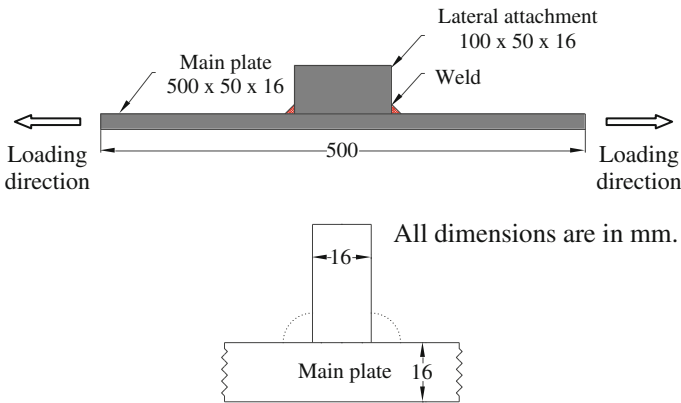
Non-load carrying longitudinal fillet welded joint
